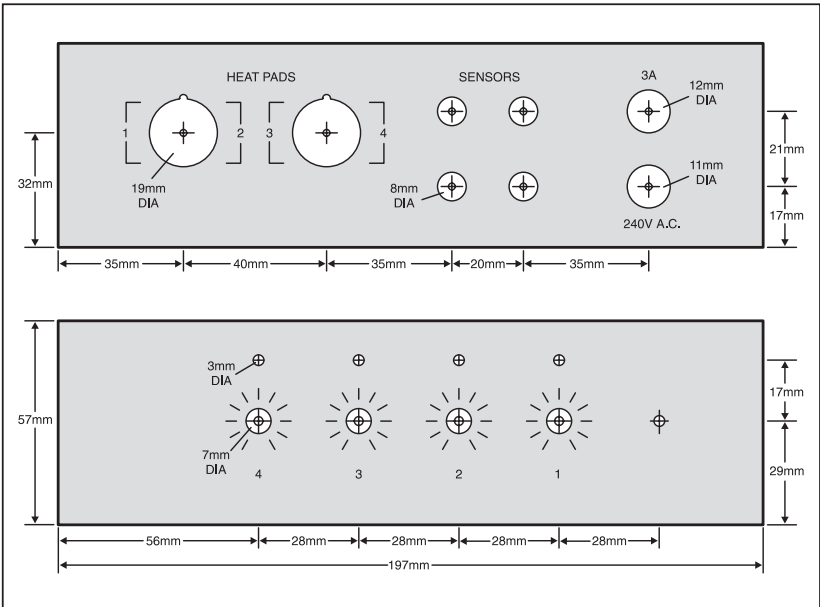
Drilling and dimension guide for the aluminium front and rear panels.
